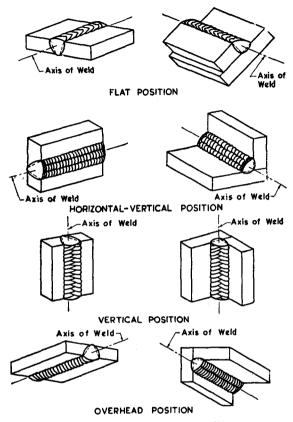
LONGITUDINAL AXIS OF WELDS
